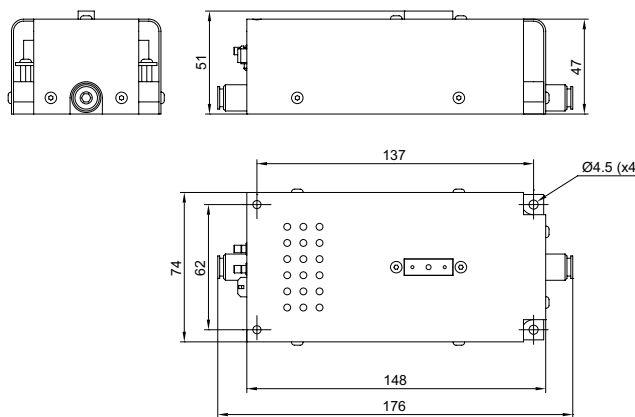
Outline drawing of encased version DPB2 series Pockels cell drivers
